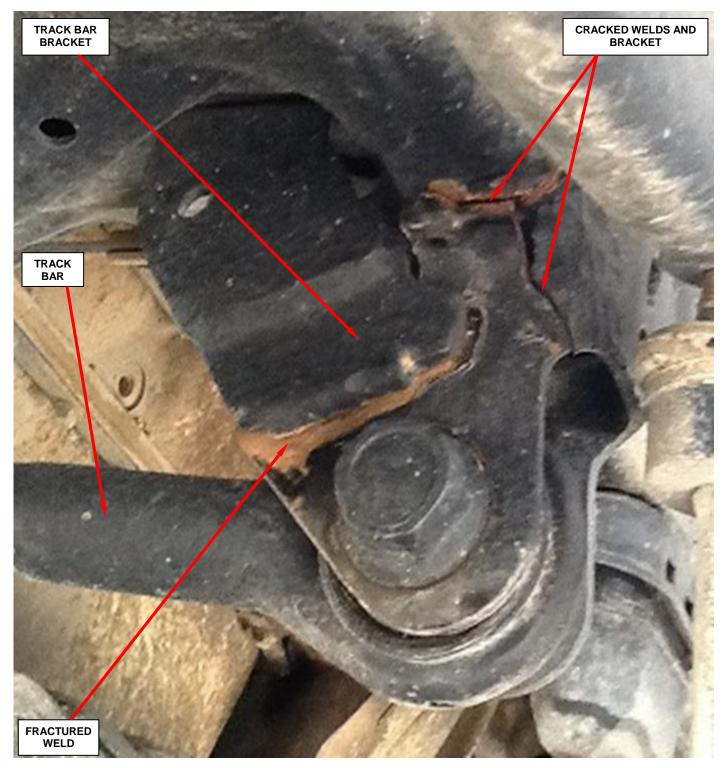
Example of a Fractured Weld at Track Bar Bracket
